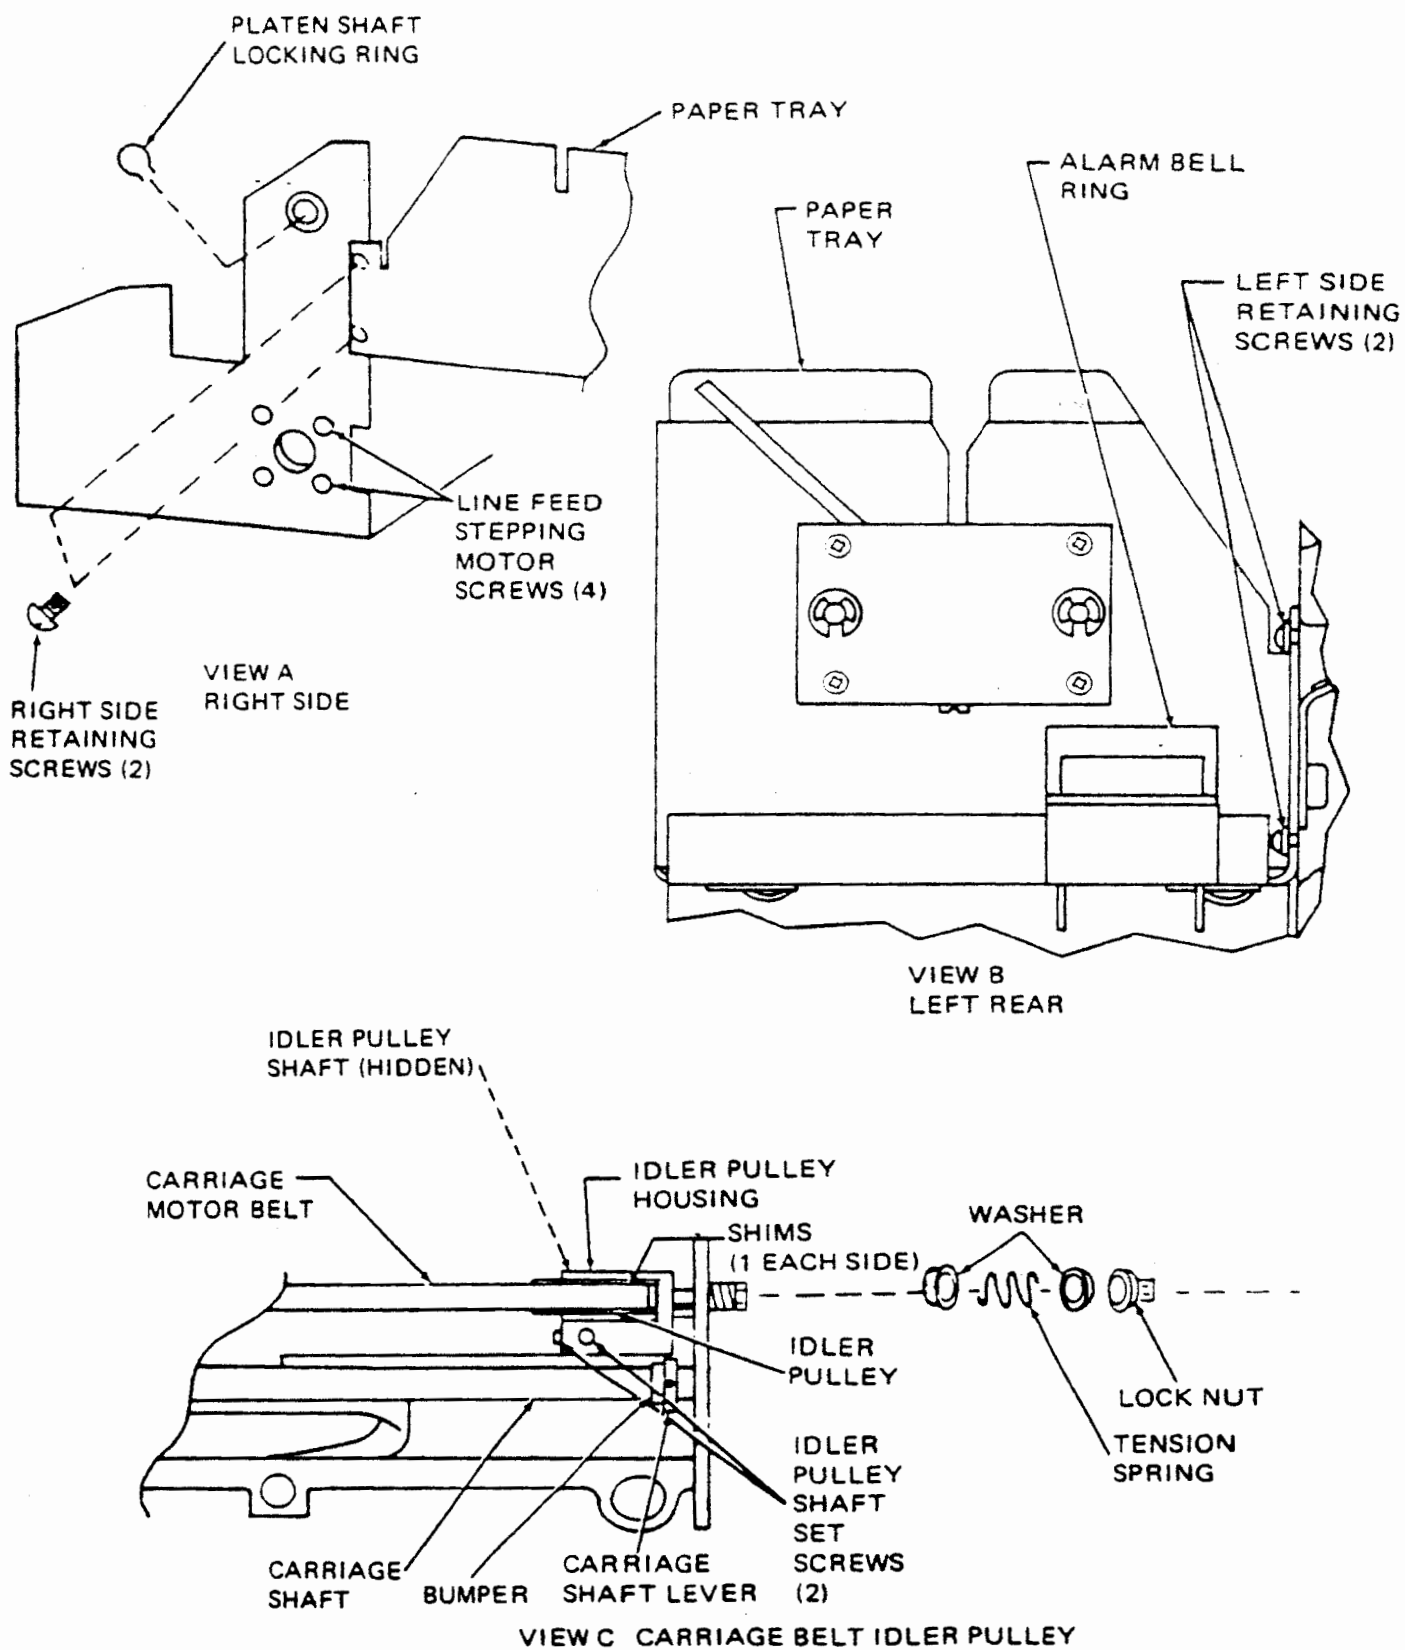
Print Mechanism Module, Carriage and Line Feed Belts (Sheet 1 of 2)
